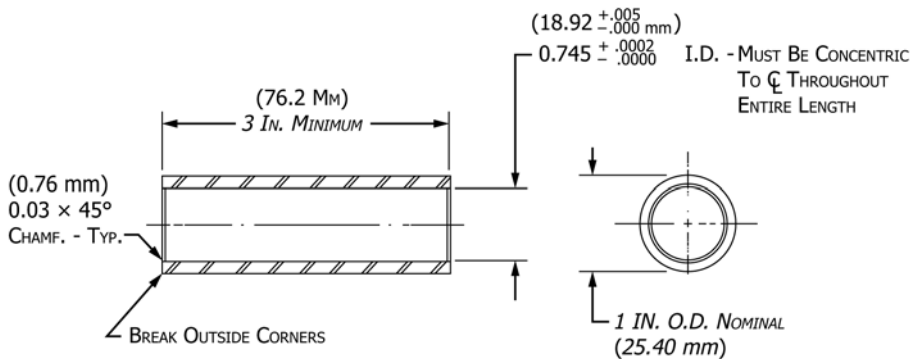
Ring Gage—CO₂ Cylinder Non-Refillable Diameter
